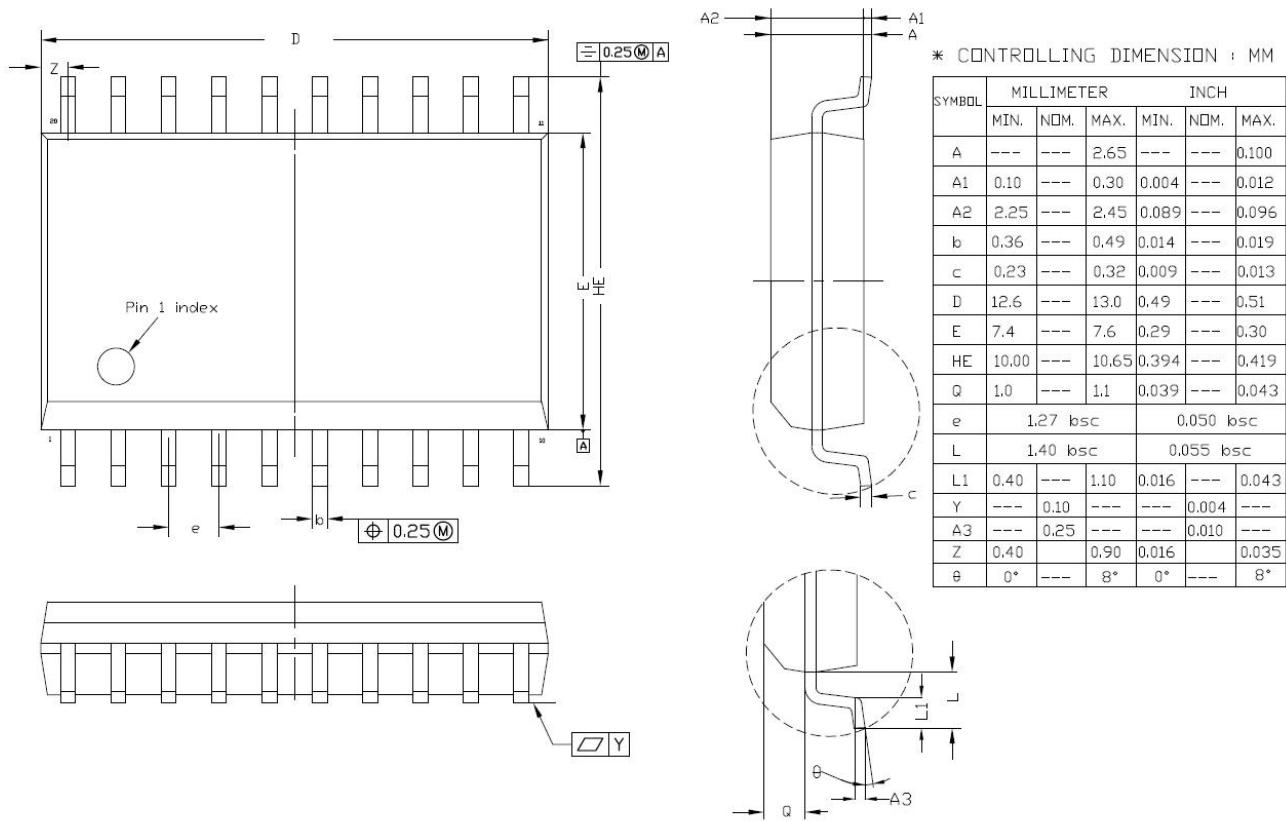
SOW20 Package Shape and Dimension in millimeters and inches
